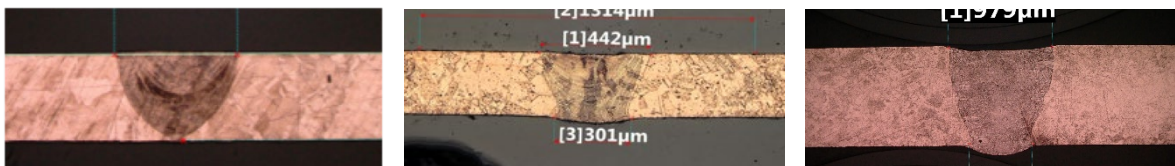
Welding of copper sheet of different thicknesses: (left) 254  $\mu m$  thick, welded at 275W; (center) 500  $\mu m$  thick, welded at 500W; (right) 1 mm thick, welded at 600W.
